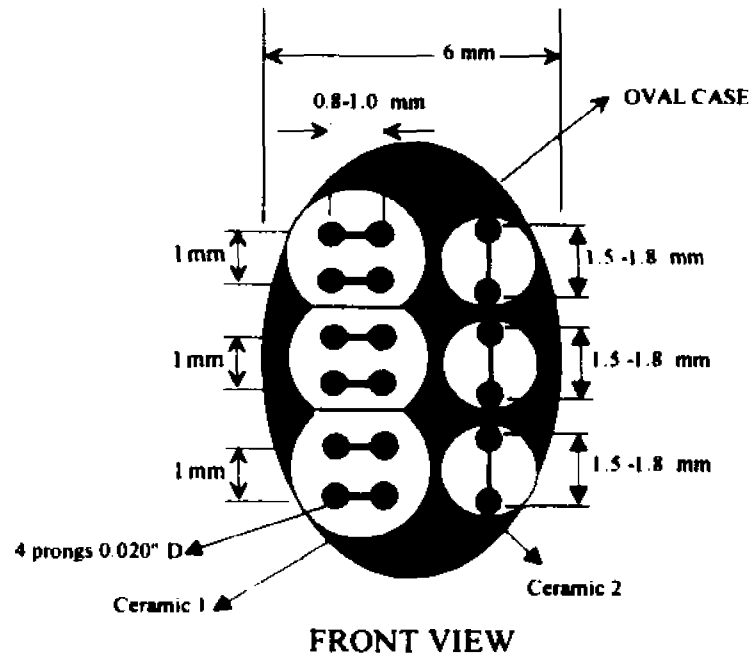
Front view of the 9 wire probe used for correlation measurements. (Drawing shown not to scale)
